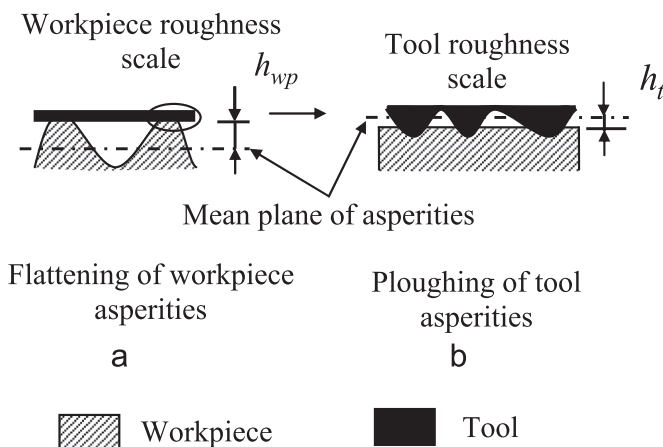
Contact between workpiece and tool at (a) workpiece roughness scale and (b) tool roughness scale.
